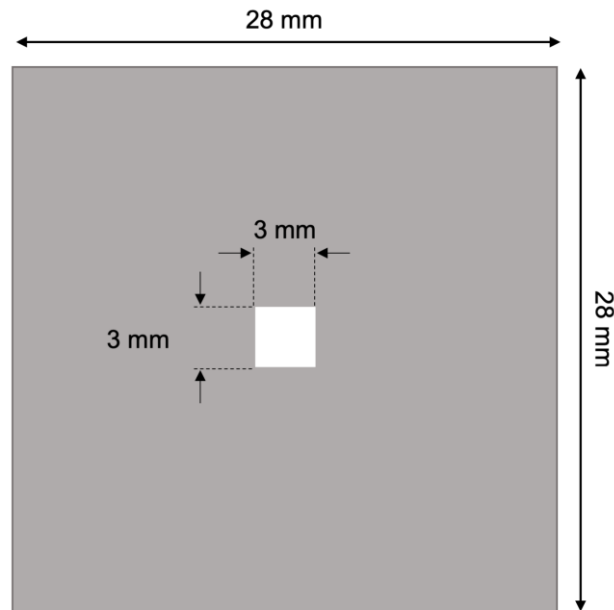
Layout of the shadow mask used for patterning the HAOL layer of the multifunctional metasurface. A 3 mm \times 3 mm hole is milled through a 28 mm \times 28 mm stainless steel mask.
